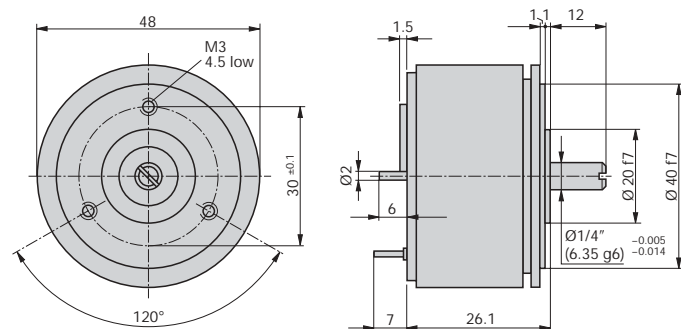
KINAX 2W2 with special drive shaft at front and at rear. At front: \varnothing 1/4", length 12 mm. At rear: \varnothing 2 mm, length 6 mm.
